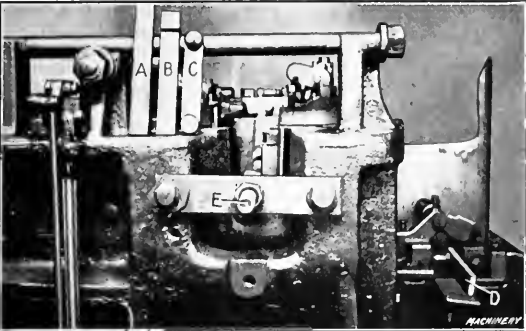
Making Draw-bar Hangers in a 3-inch Ajax Forging Machine
